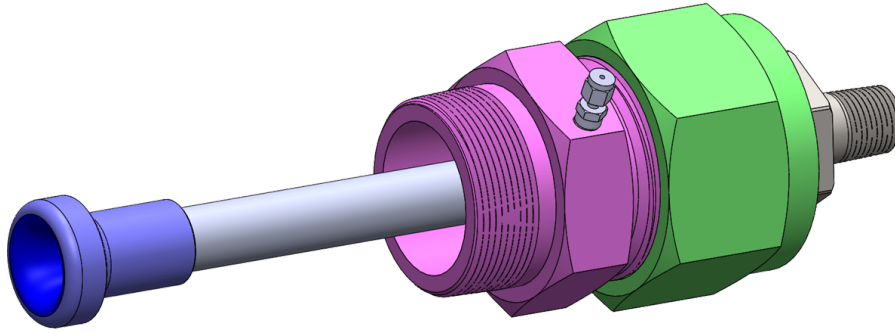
New bellmouth mounting design incorporating a 2" Swagelok fitting for easy removal and a smaller Swagelok tapped into the hex for thermocouple mounting
